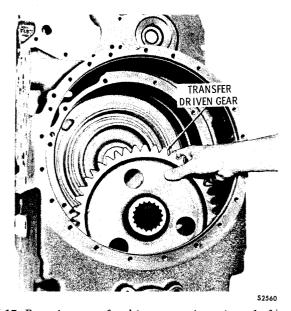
Removing transfer driven gear (one-piece shaft)
